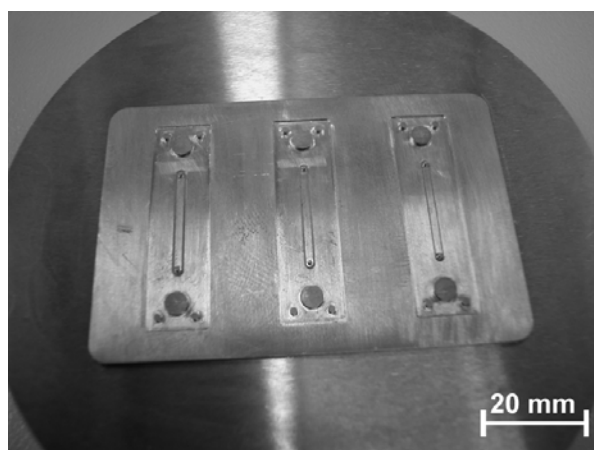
Photograph of a brass embossing mold, fabricated by mechanical milling. The mold contains the negative images of three fluidic devices.
